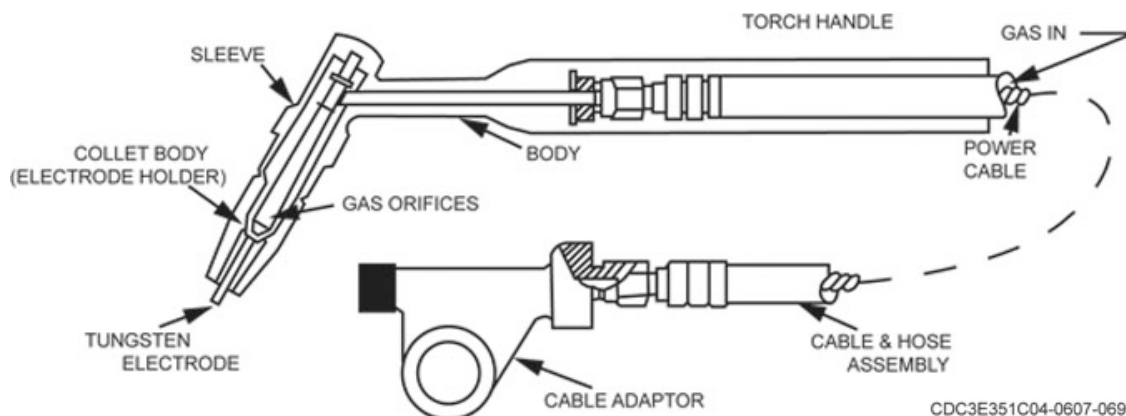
Air-cooled, inert gas shielded welding torch.
